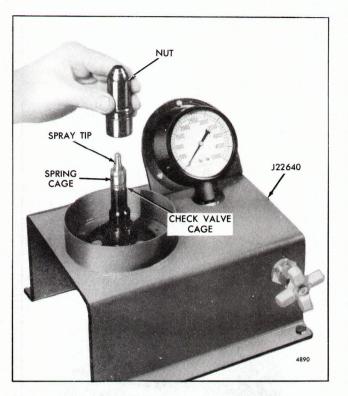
Installing Injector Valve Parts on Auxiliary Tester J 22640
